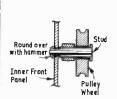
Section through the pulley assembly riveted to holes J in the plate in Fig. 14
